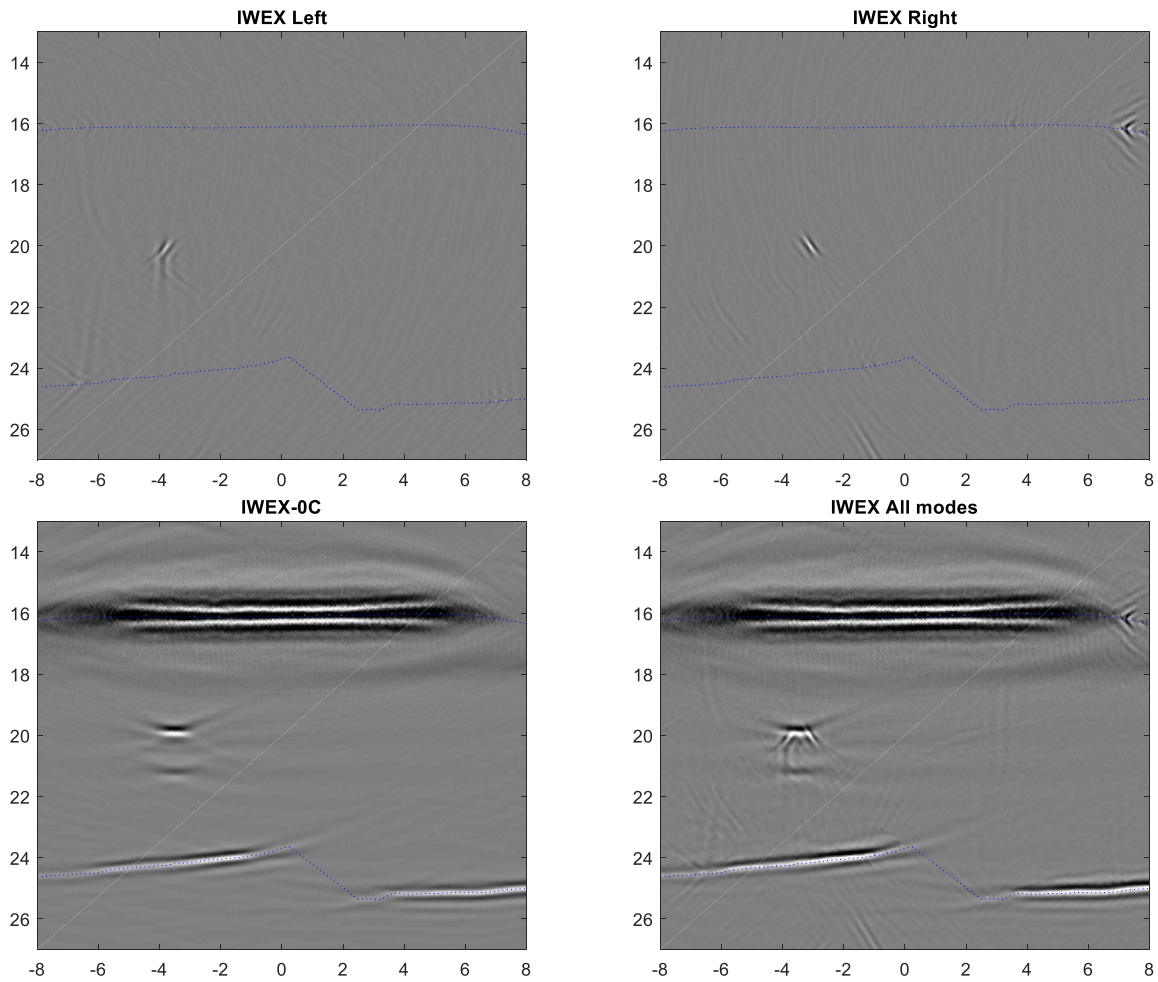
, Immersion IWEX measurements of a 22" pipe, ERW weld, 8 mm wall-thickness, with a 1.1 mm side-drilled-hole.
